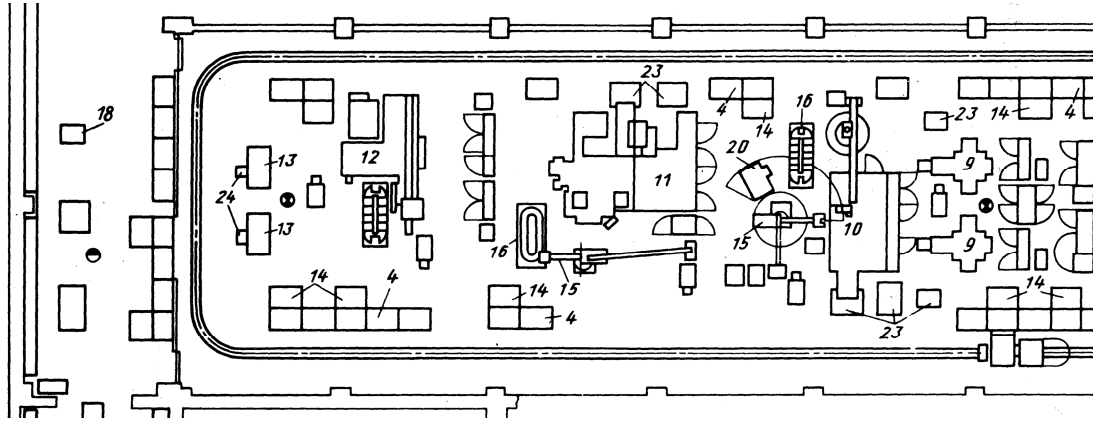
A layout of ACB-201 flexible manufacturing system for producing turned parts in small-scale and medium size production (on the left)
